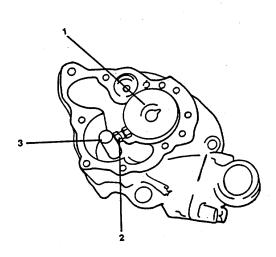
Install the Guide Bushing into the Gear Pocket.
